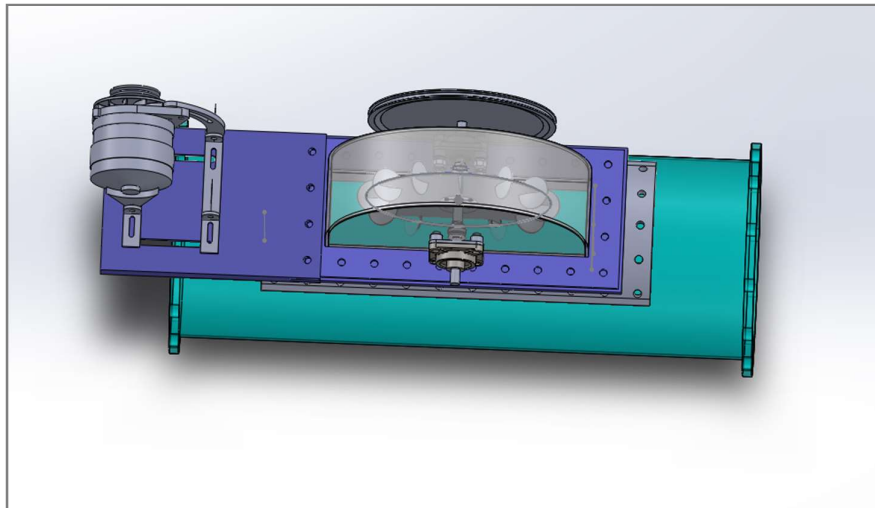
Three-dimensional design illustration of the IPW2 turbine installation – top view
